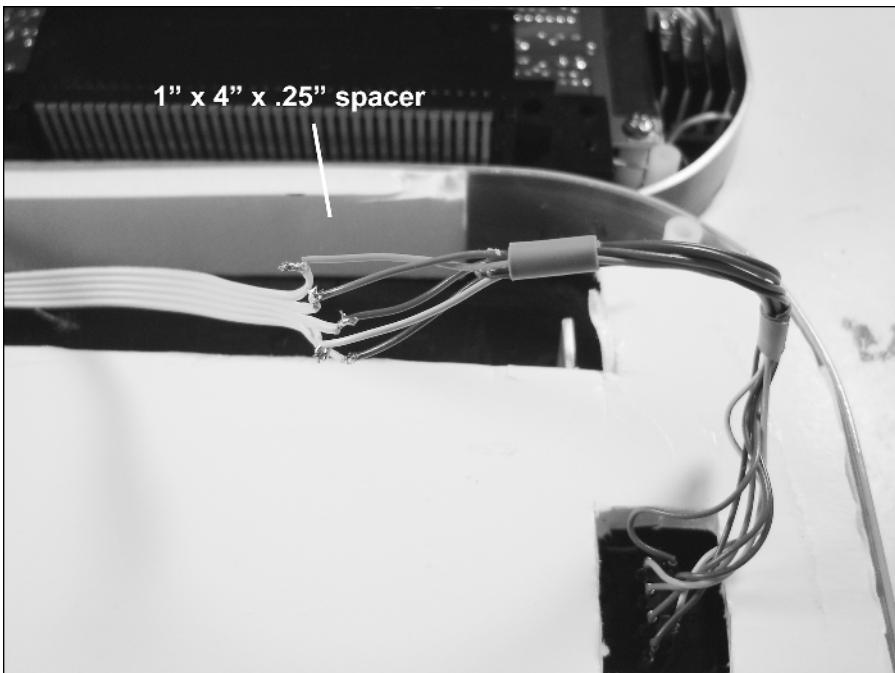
Attaching the Player 2 cable to the jack and the 1" × 4" spacer.
